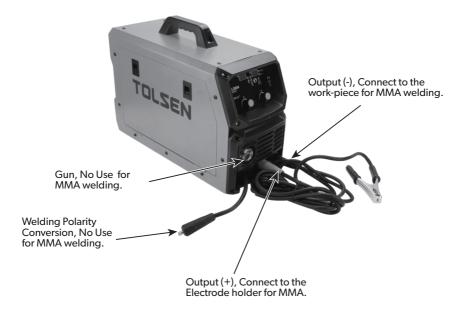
Connection of Electrode holder and Work-piece Welding cable for MMA welding
